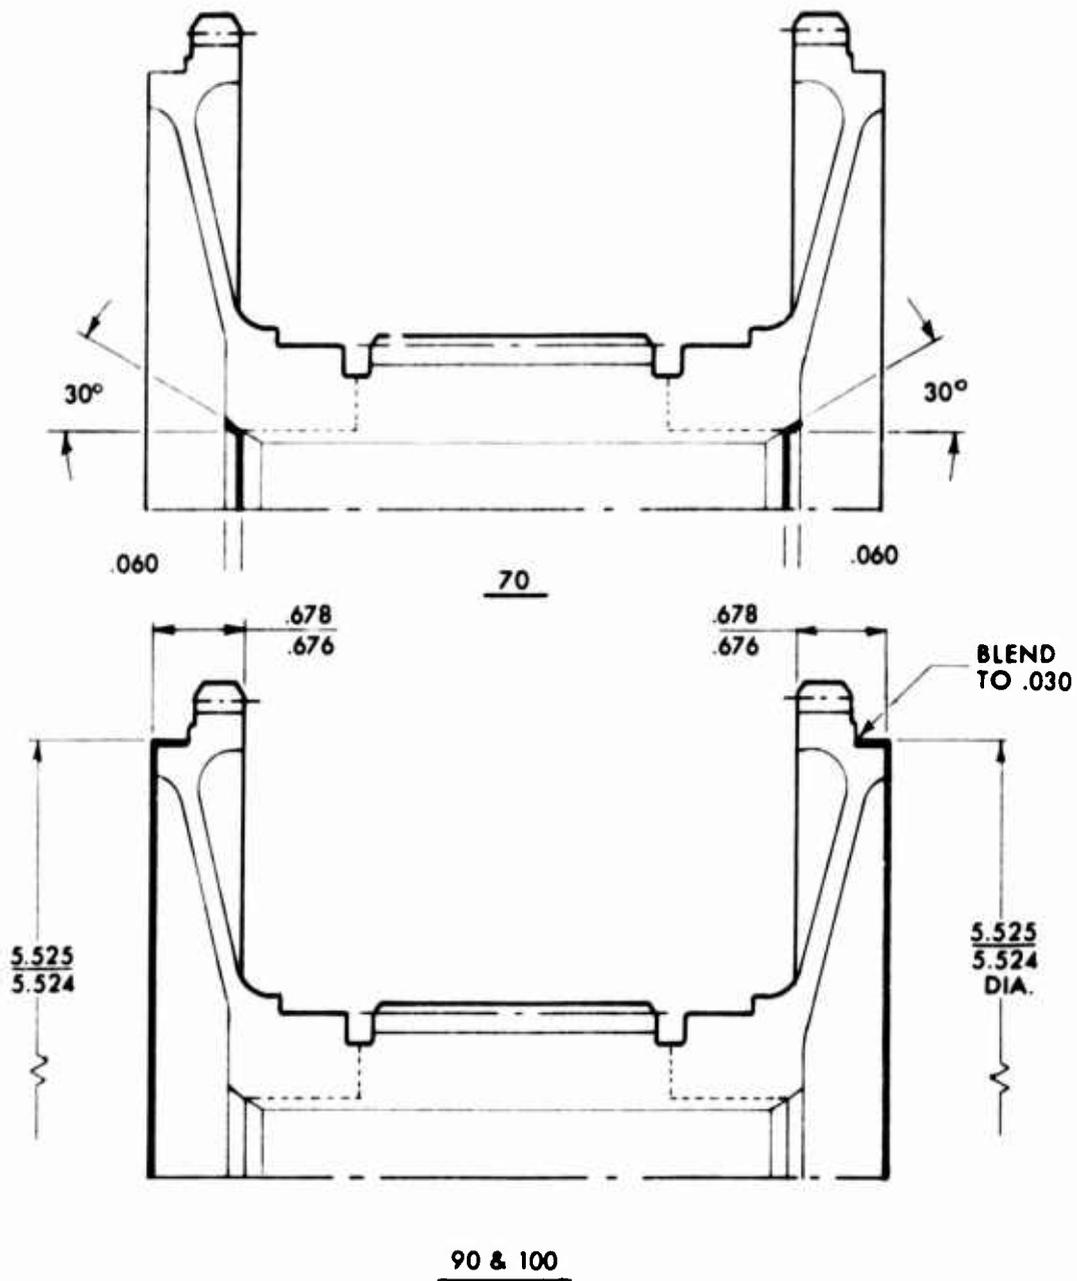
RG351-11182-063, Machine Operation Drawing.
